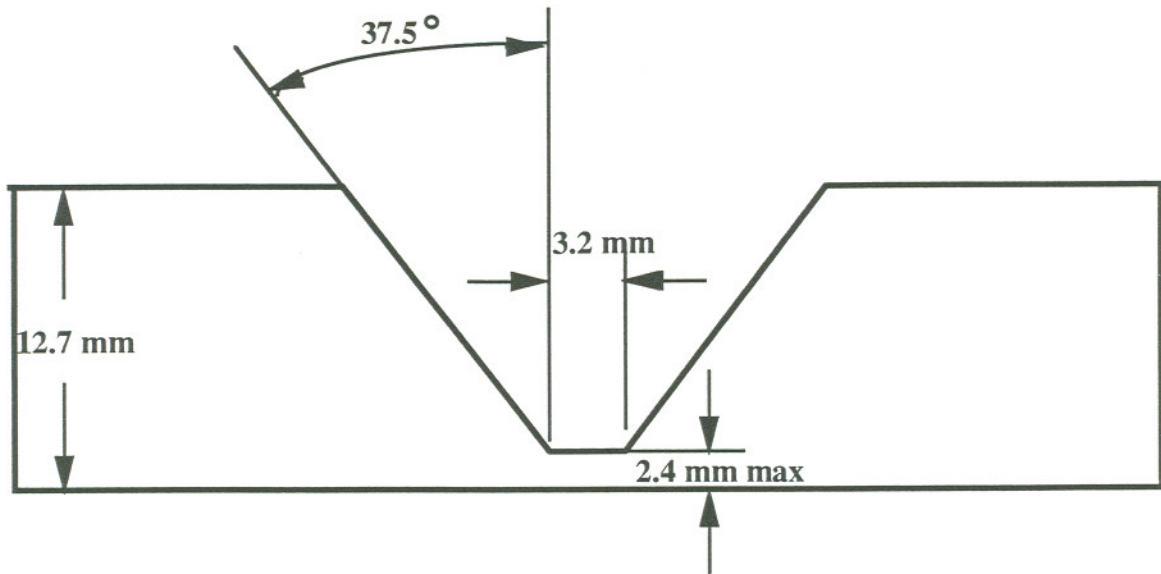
Weld Groove Geometry of the OGI Weldment
